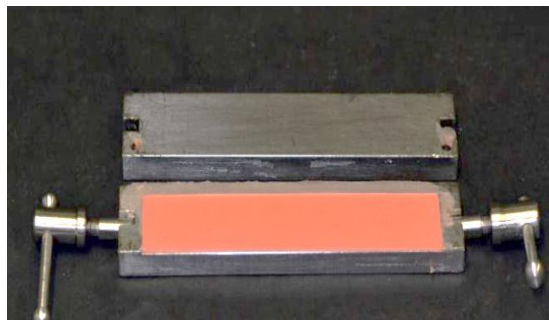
Metal mold opened after cure of the acrylic resin.
